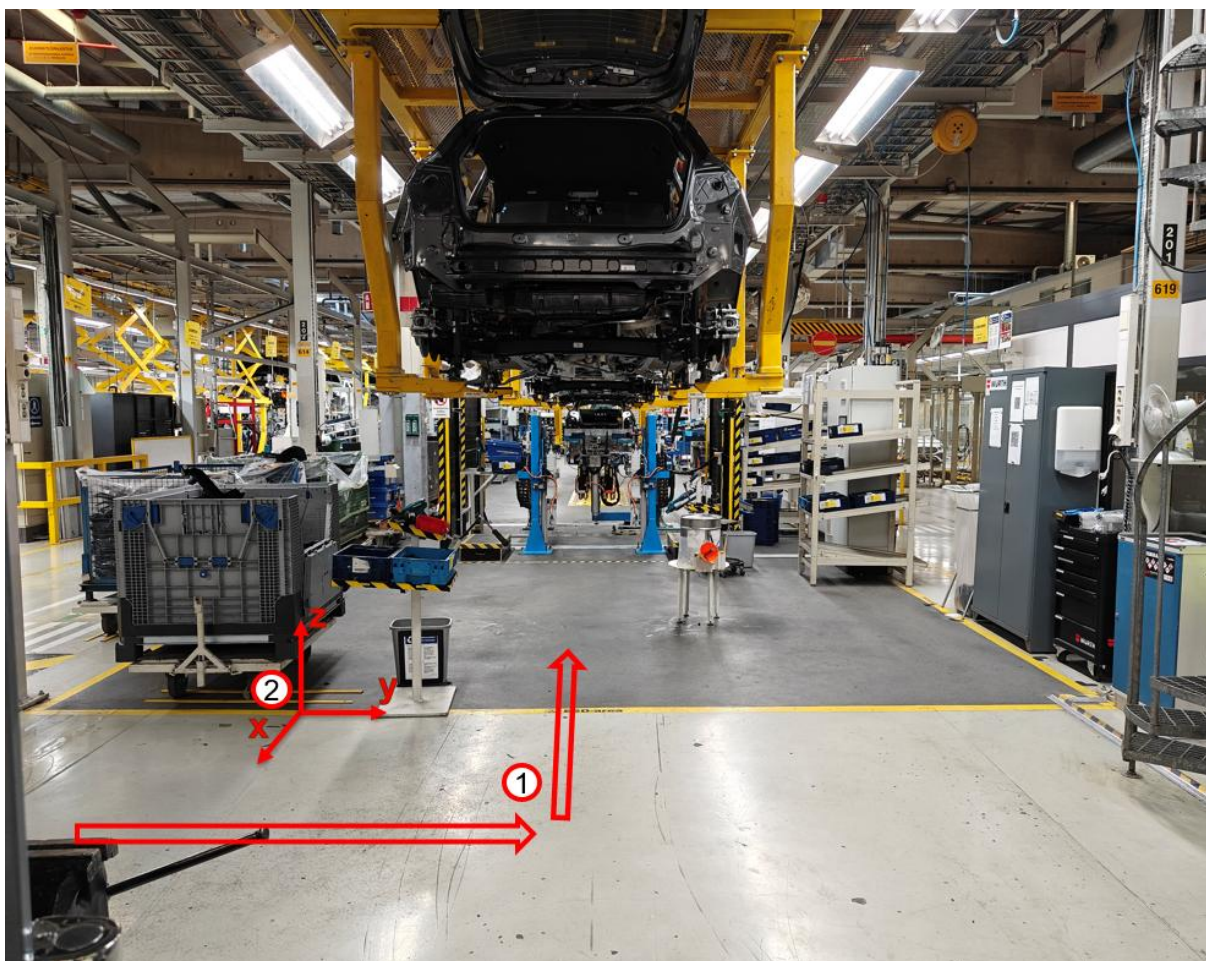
Quality control area at the start of assembly line 2, where the plug installation inspection machine vision system could be implemented. Circle 1 arrows indicate the direction of vehicle movement on the conveyor, and circle 2 indicates the axis along which system specification data is defined. From: the author (2026).
